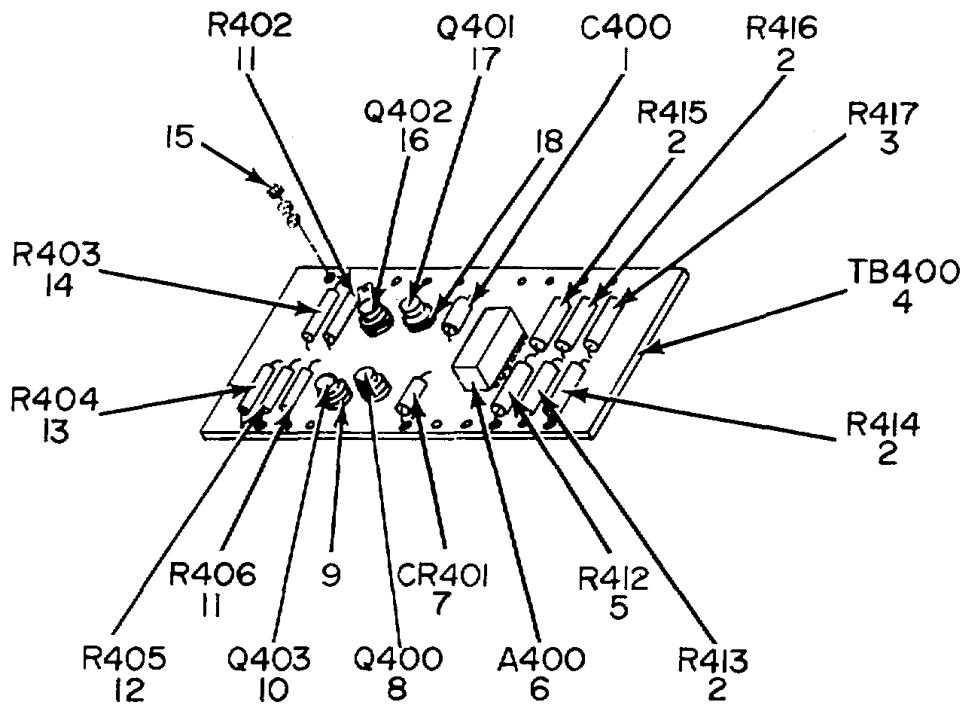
Adapter, Test MX-8839/ASM-417, Board Assembly, 6470-90184-041.
